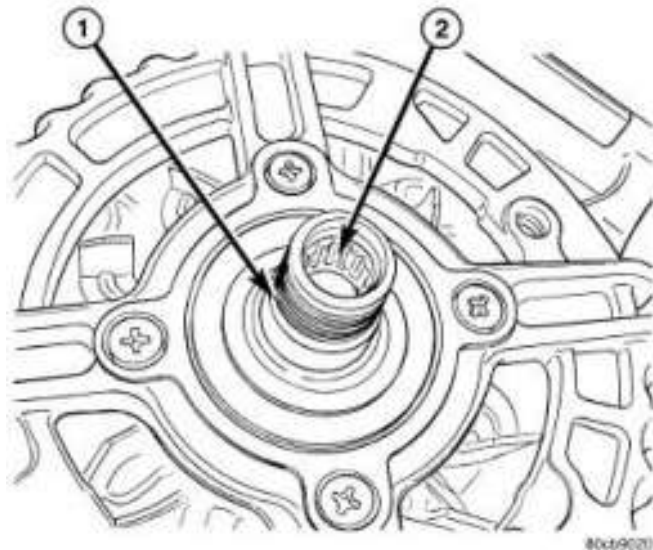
END OF GENERATOR SHAFT (SPLINED)
